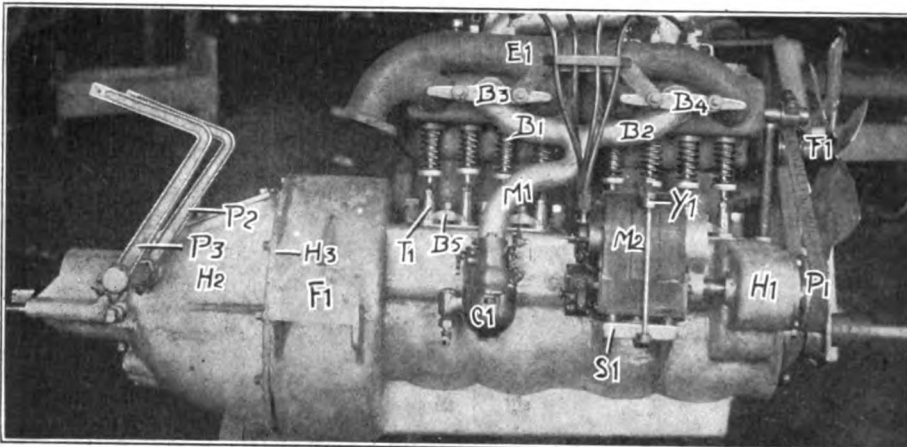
Marathon motor showing a self-contained motor, magneto and carbureter
